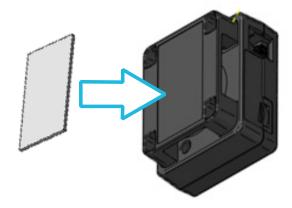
Pasting Double-sided Tape to External Buzzer
